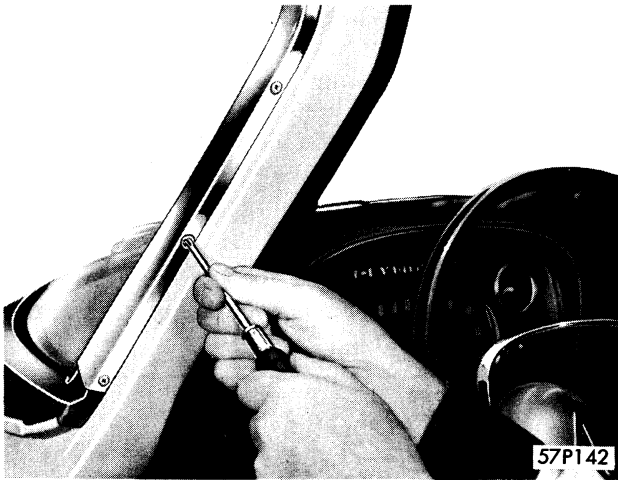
Removing Side Moulding Attaching Screws at "A" Post
